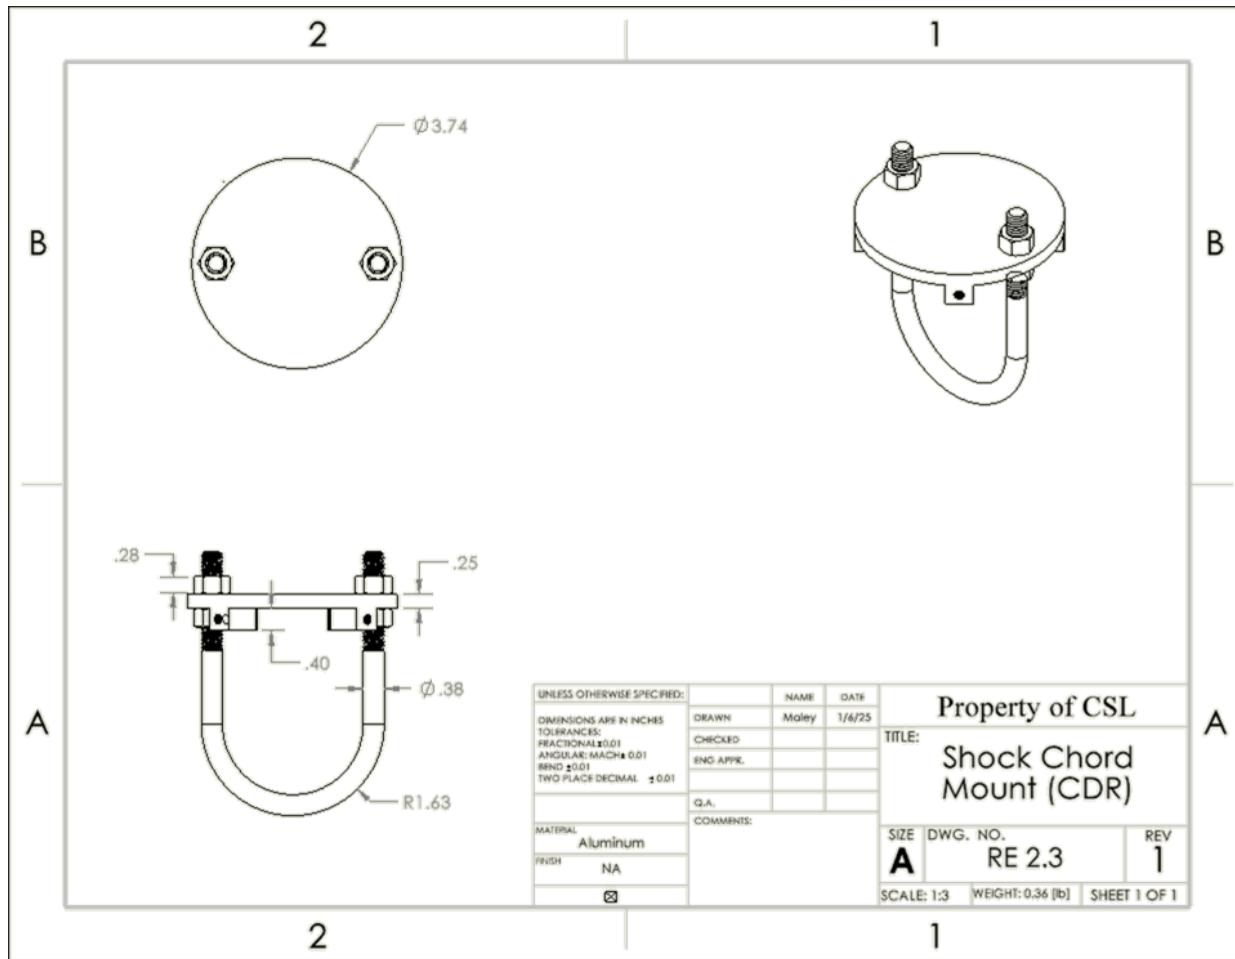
Shock chord mount SOLIDWORKS Drawing.
